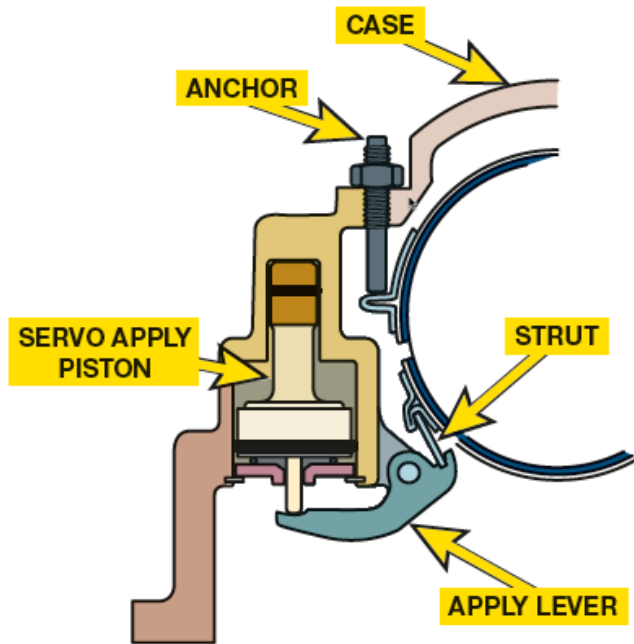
Band and servo assembly. A non-adjustable band will have a second strut in place or the adjusting screw.
